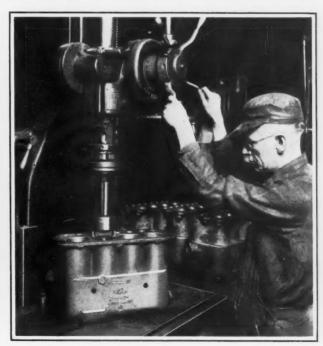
Facing Combustion Chambers—Another Example of the Application of Carboloy Tools in the White Motor Plant; Pieces Finished per Grind: 1000
